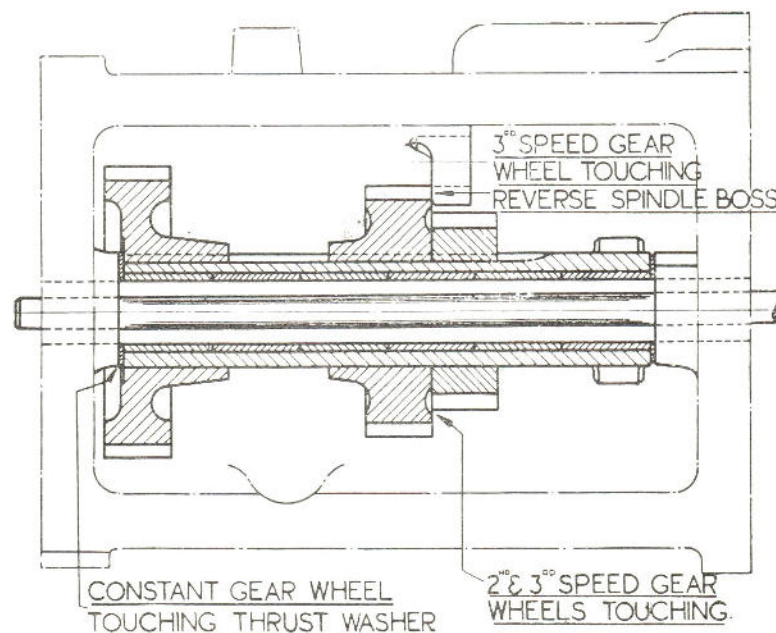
Position of countershaft gears prior to engagement with mainshaft.
